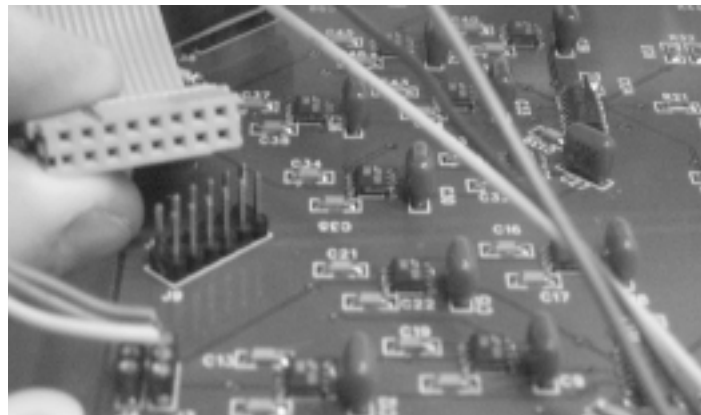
Photo illustrating connection to be made on the “Demux Channels 0 to 15” board.
